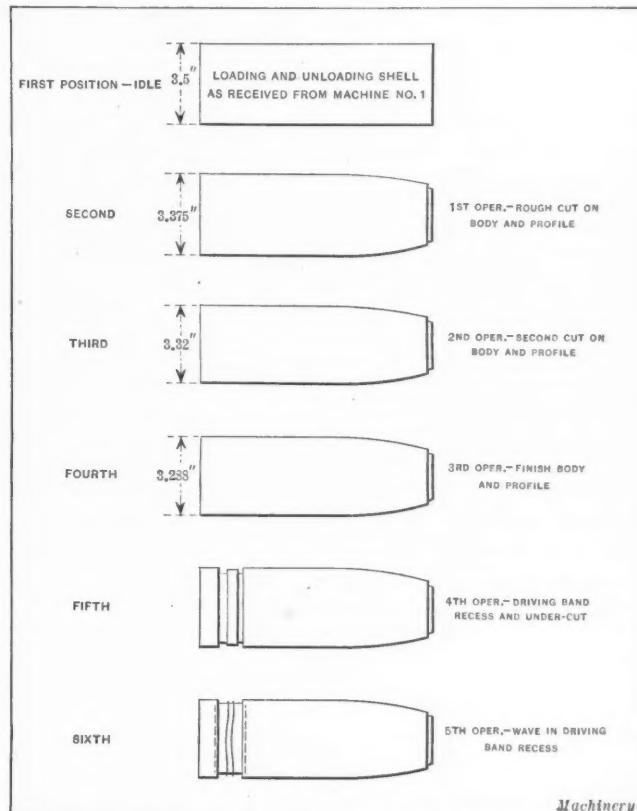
Diagram illustrating Sequence of Operations performed on Machine shown in Fig. 7
